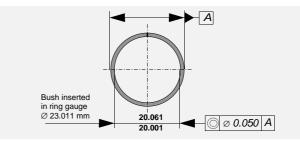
Test C, Data for drawing (example D_i = 20 mm)
